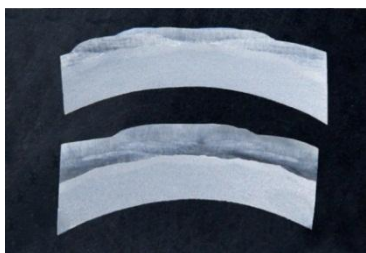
Transversal macro section single and double weld overlay welded with CMT 1 layer 3,14 %, 2 layer 0,47 Fe content
